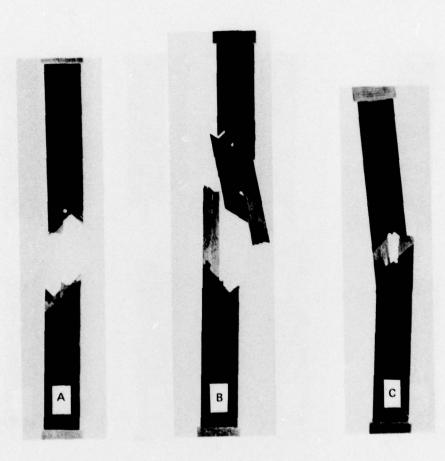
Fatigue failures of multi-directional 0 ± 45° CFC containing a 2mm diameter hole. Specimens were preaged for 3000 hours at 40°C and their endurances to failure were; specimen (A) 1632400, (B) 949100, (C) 233500 cycles
